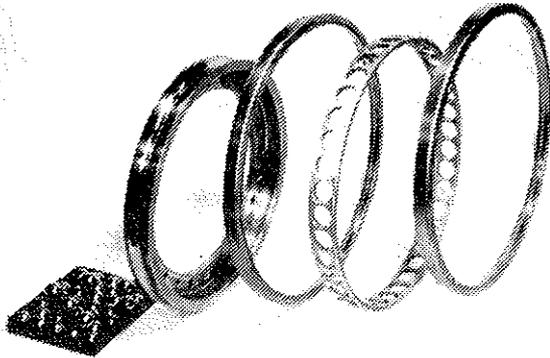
SINGLE BALL BEARING DISASSEMBLED
